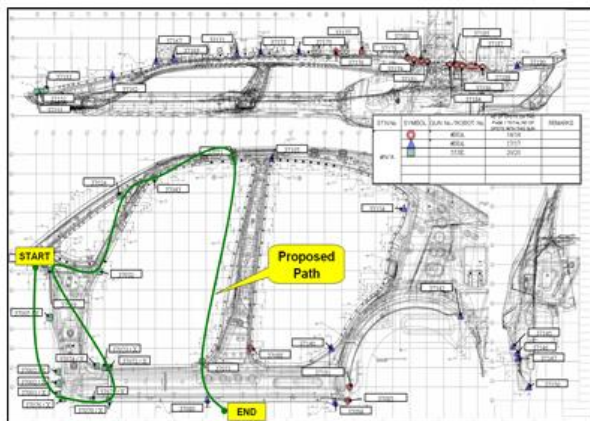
(a): Robotic arm/manipulator path profile for inner door spot welding (without optimization)
